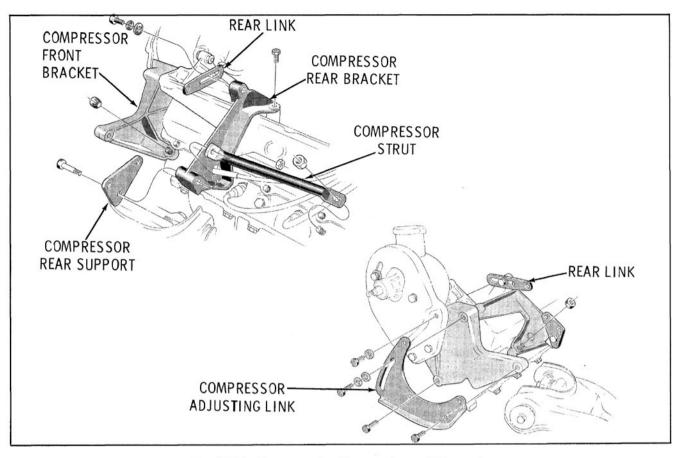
Compressor Bracket Attachment (33 Series)
